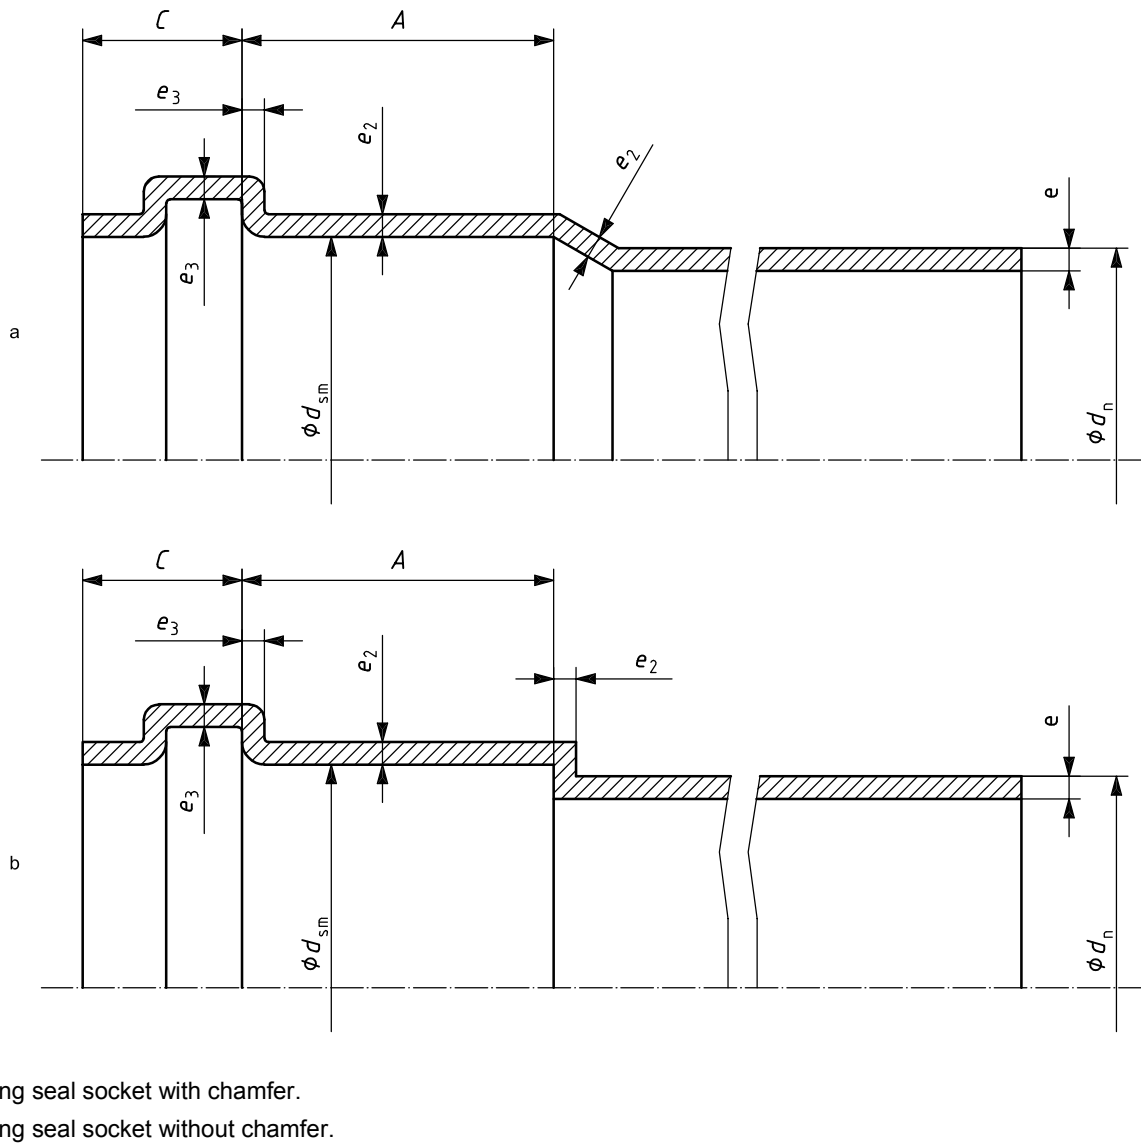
Dimensions of sockets for elastomeric ring seal joints
